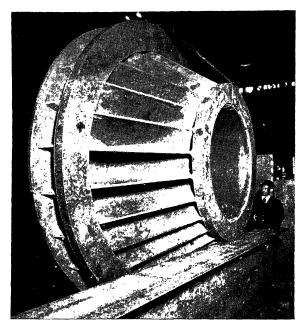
A.—Welded-up lower part of an assembly unit. (Bethlehem Steel Co.)
